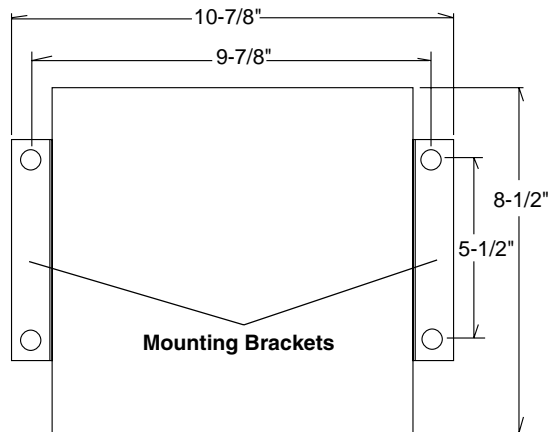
Mounting Dimensions - RVC Control Station w/Suggested Mounting Brackets
